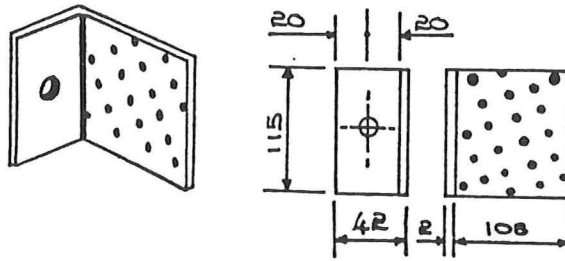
Lumberlok concrete fixing cleat CF1.
